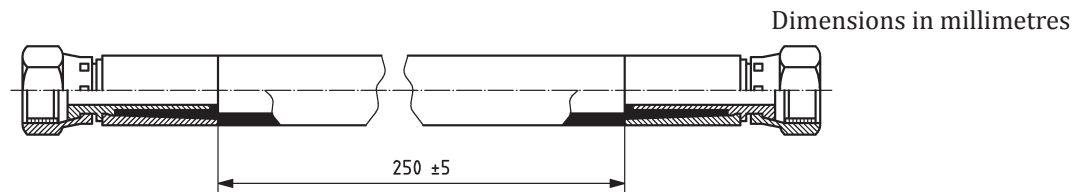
Internal free length, with tolerance, of test piece
